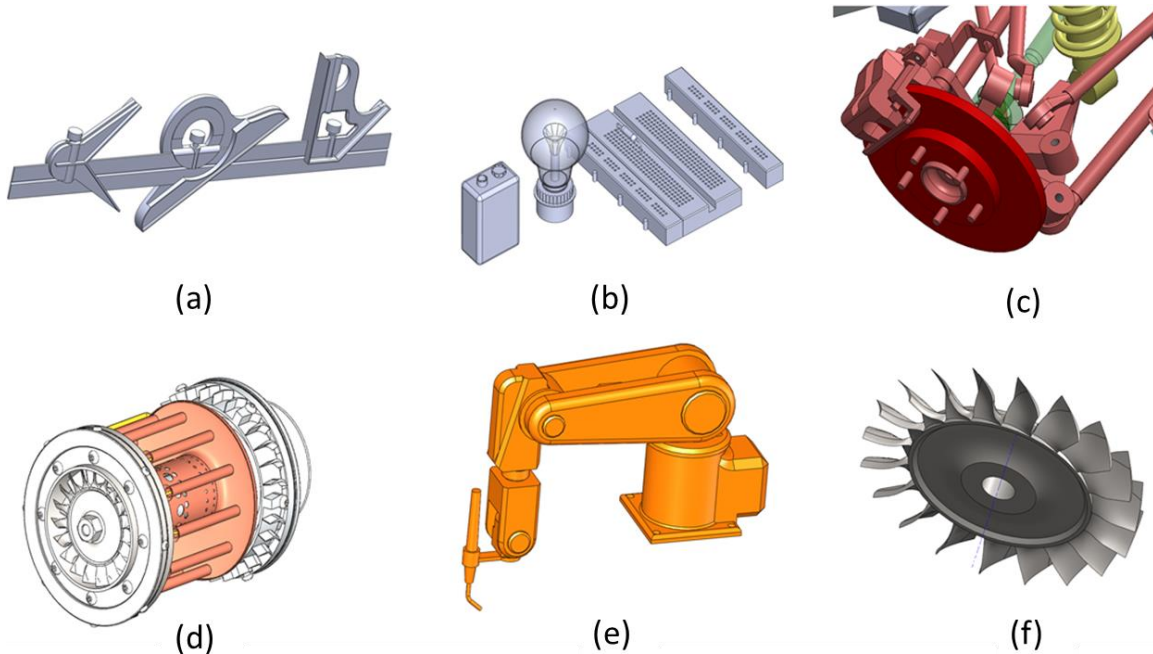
CAD module examples - (a) combination square, (b) electrical components, (c) automobile subsystem, (d) gas turbine combustor, (e) 6 degree-of-freedom robot arm, and (f) gas turbine fan assembly
